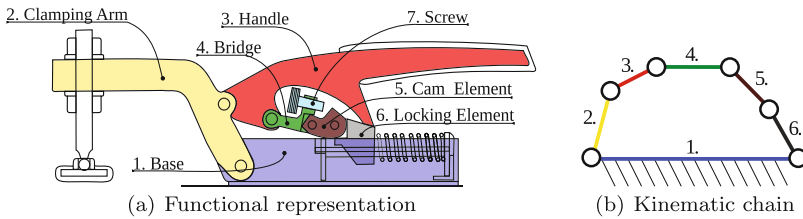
Bessey 1 - auto-adjust toggle clamp.
